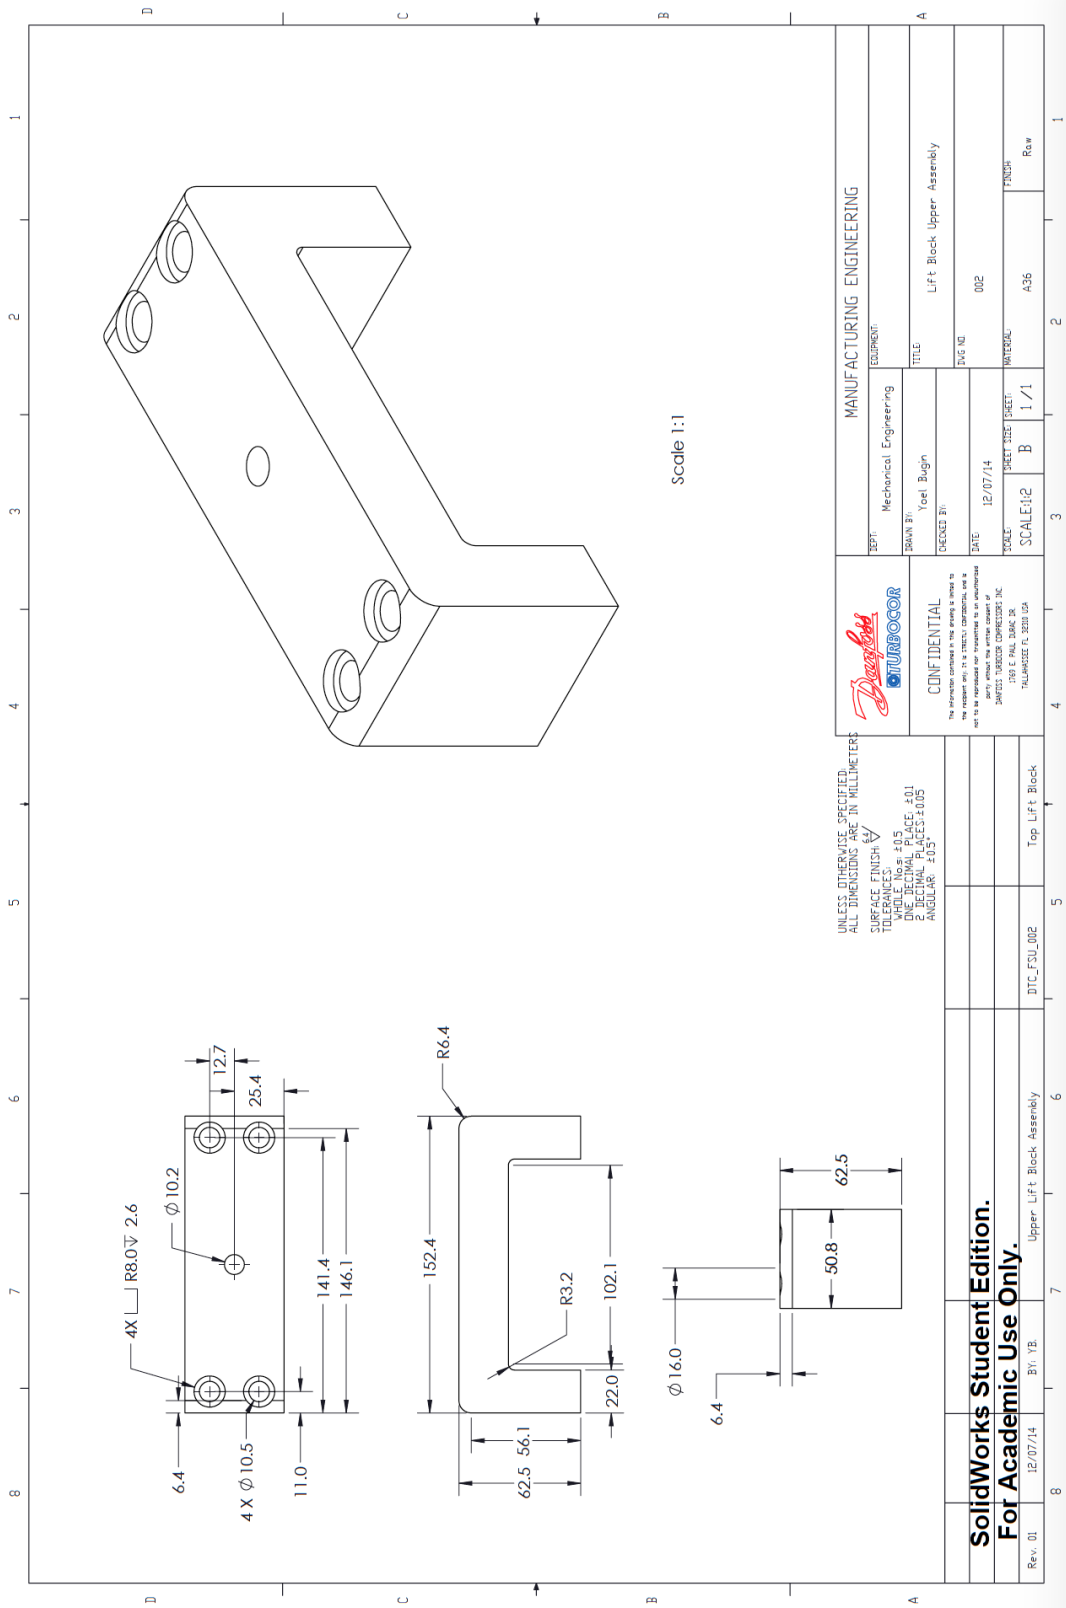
Drawing of Lifting Point Adjustment Block (2)
